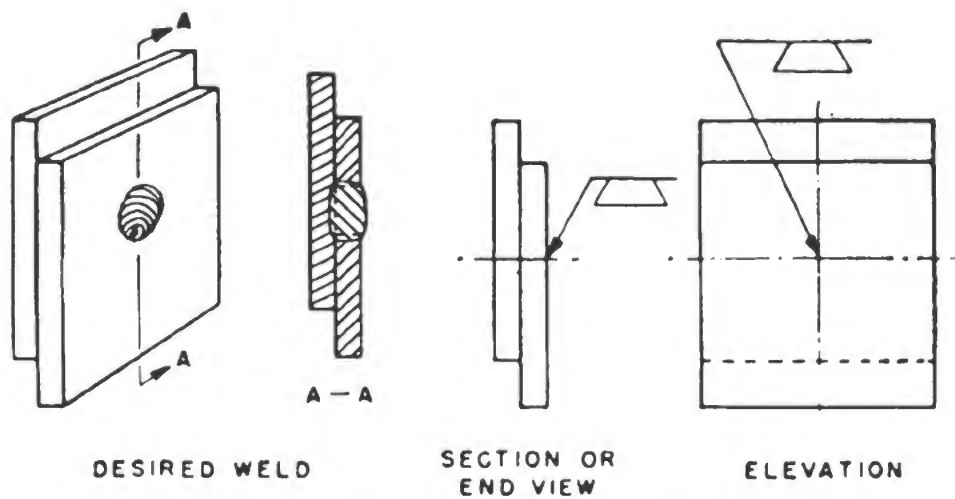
Use of arrow-side plug welding symbol.
